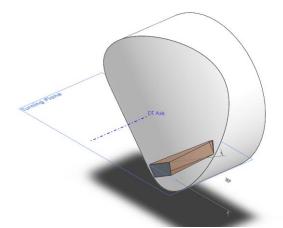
For the same part and tool as in Fig. 1, the primary clearance issue is resolved when the tool is rotated about its shank axis by 30°.
